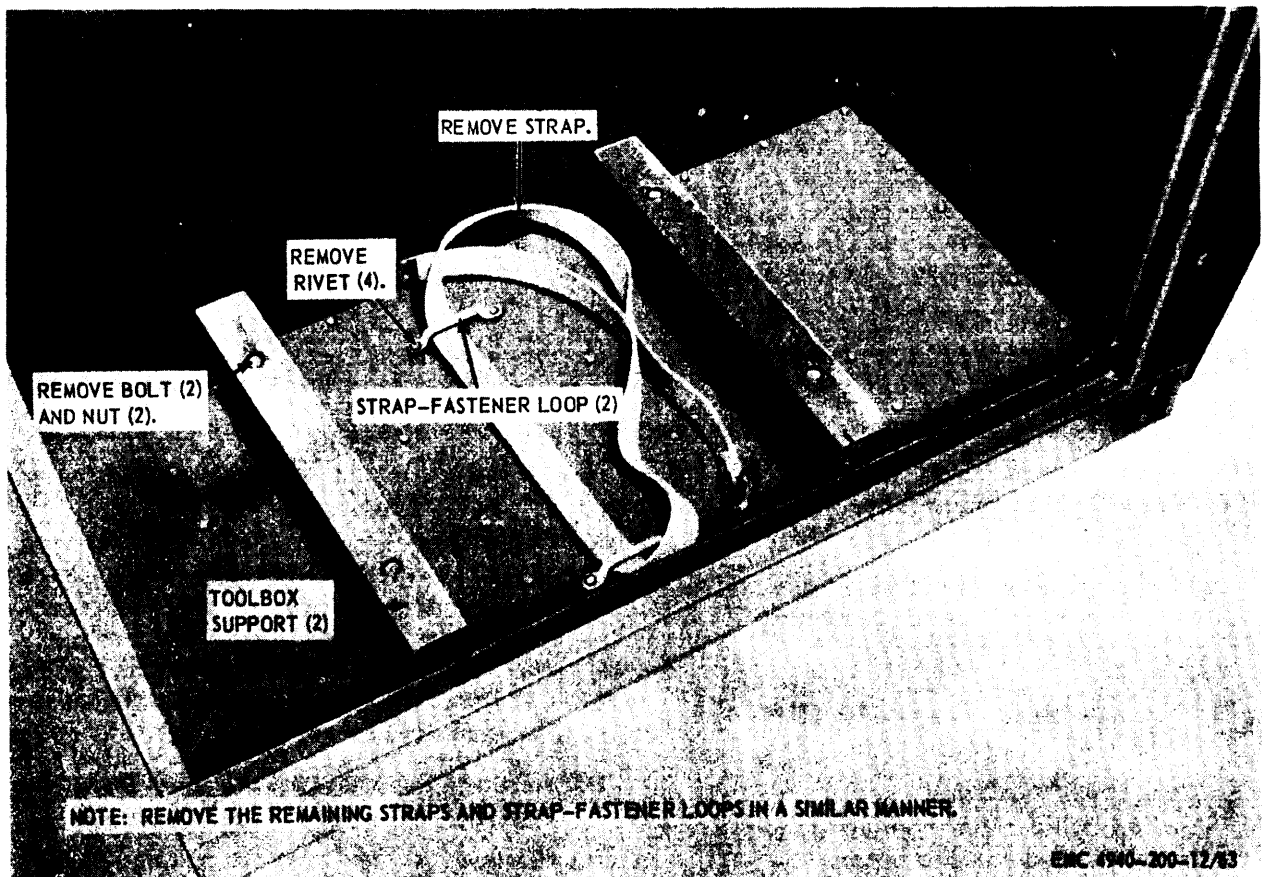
Toolbox supports, strap, and strap-fastener loops, removal and installation.
